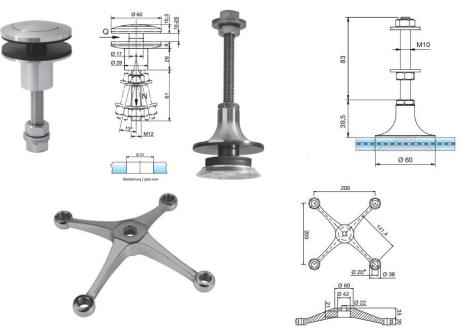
Sample steel fittings from Pauli + Sohn GmbH, regular point fixing bolt on the left, countersunk point fixing bolt on the right and spider fitting at the bottom [35]
